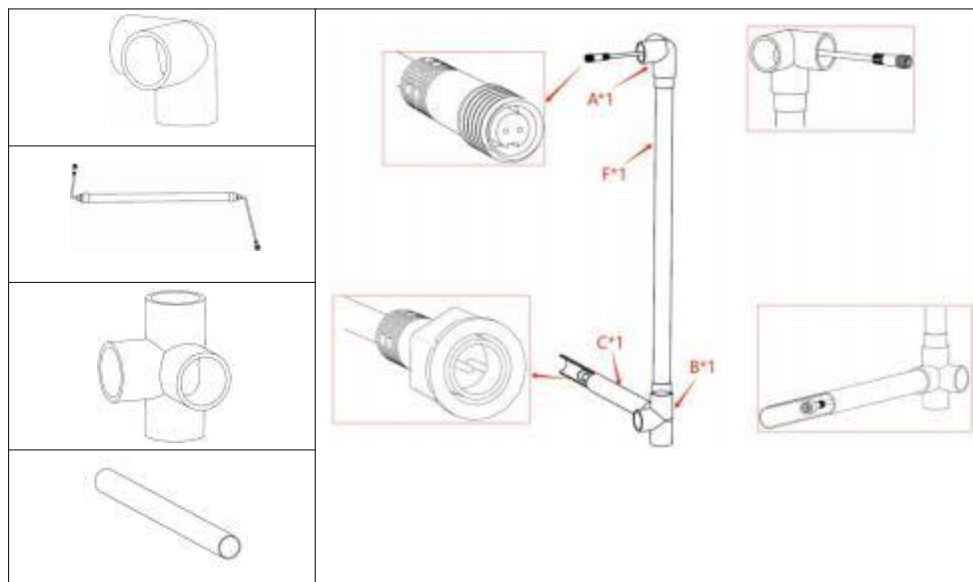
Assemble a 355MM horizontal tube, a 4-pass, a 3-pass, and a lamp together as per the figure (note that the lamp wire is in the hole of the 3 barrels and the 4-pass outlet).
